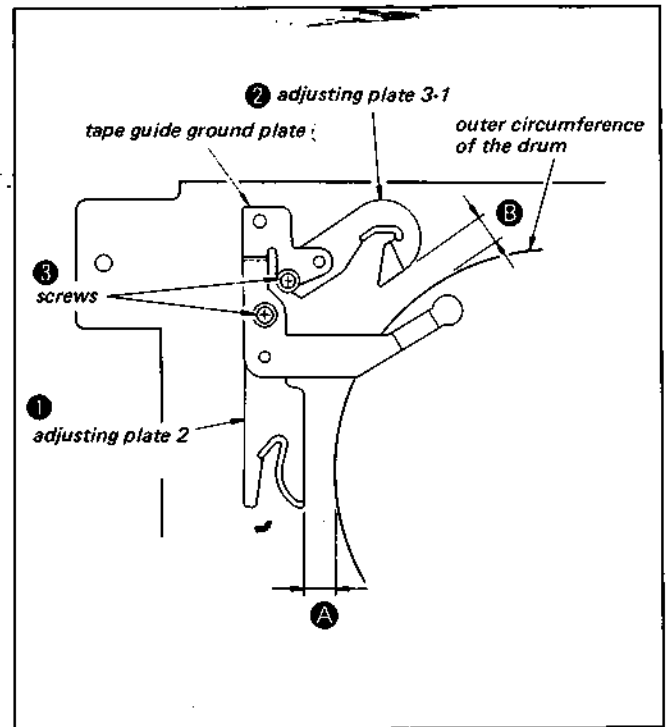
Measurement of the position of adjusting plates 2 and 3-1
